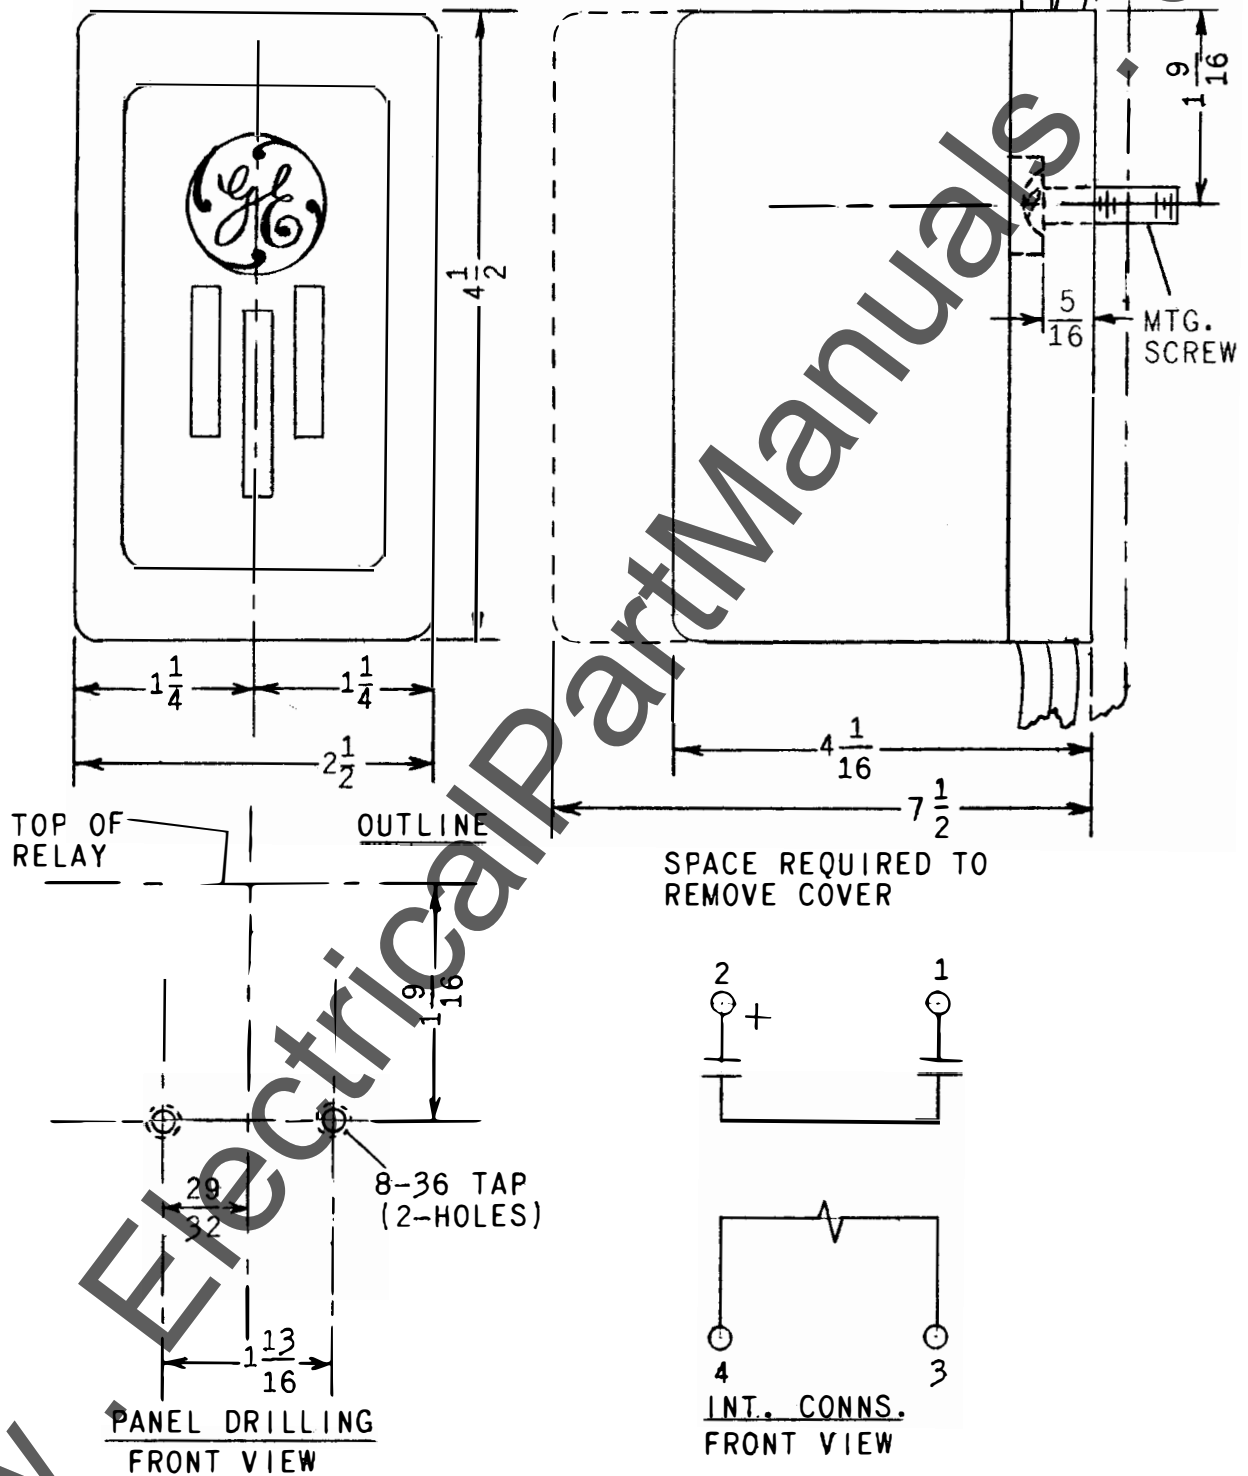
Outline, Panel Drilling And Internal Connection Dimensions For Type HGA33A Relay
